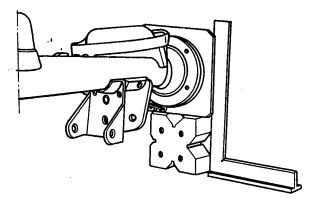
Checking Rear Axle Beam for Twisting Deformations with Angle Gauge Applied to Edge of Flange A.70172
